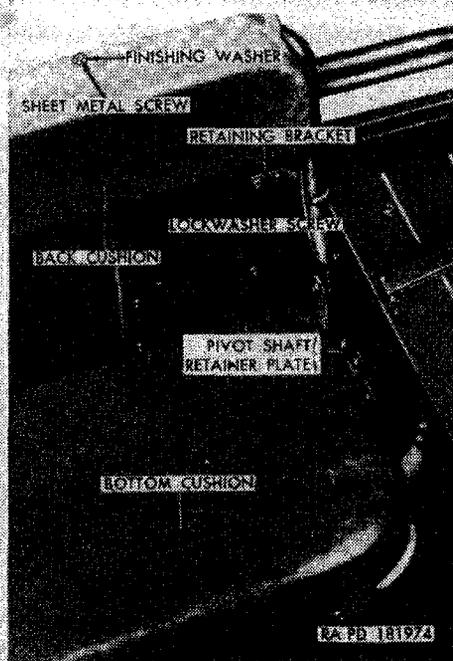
Rear seat assembly (M38A1)—installed—left side view.
